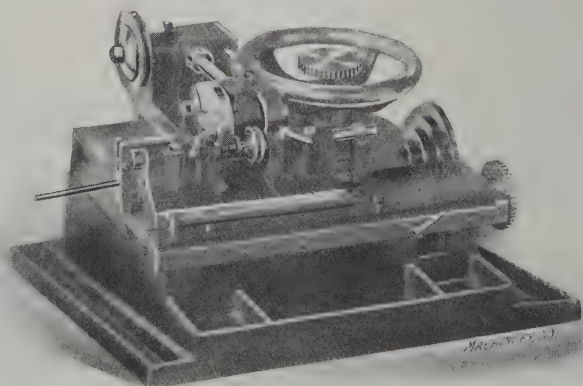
Rear View of Gang Drill, showing Arrangement for Driving with one Continuous Shaft
